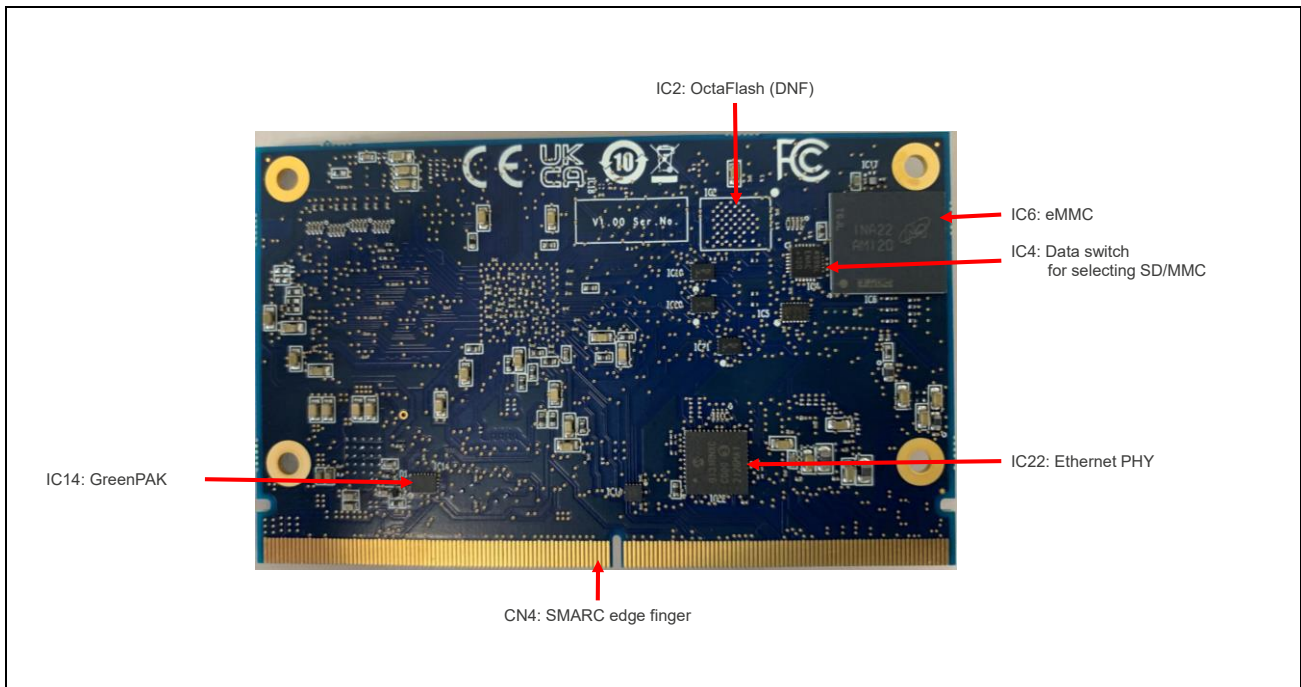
Component Layout of the RZ/G2UL SMARC Module (Bottom View)
